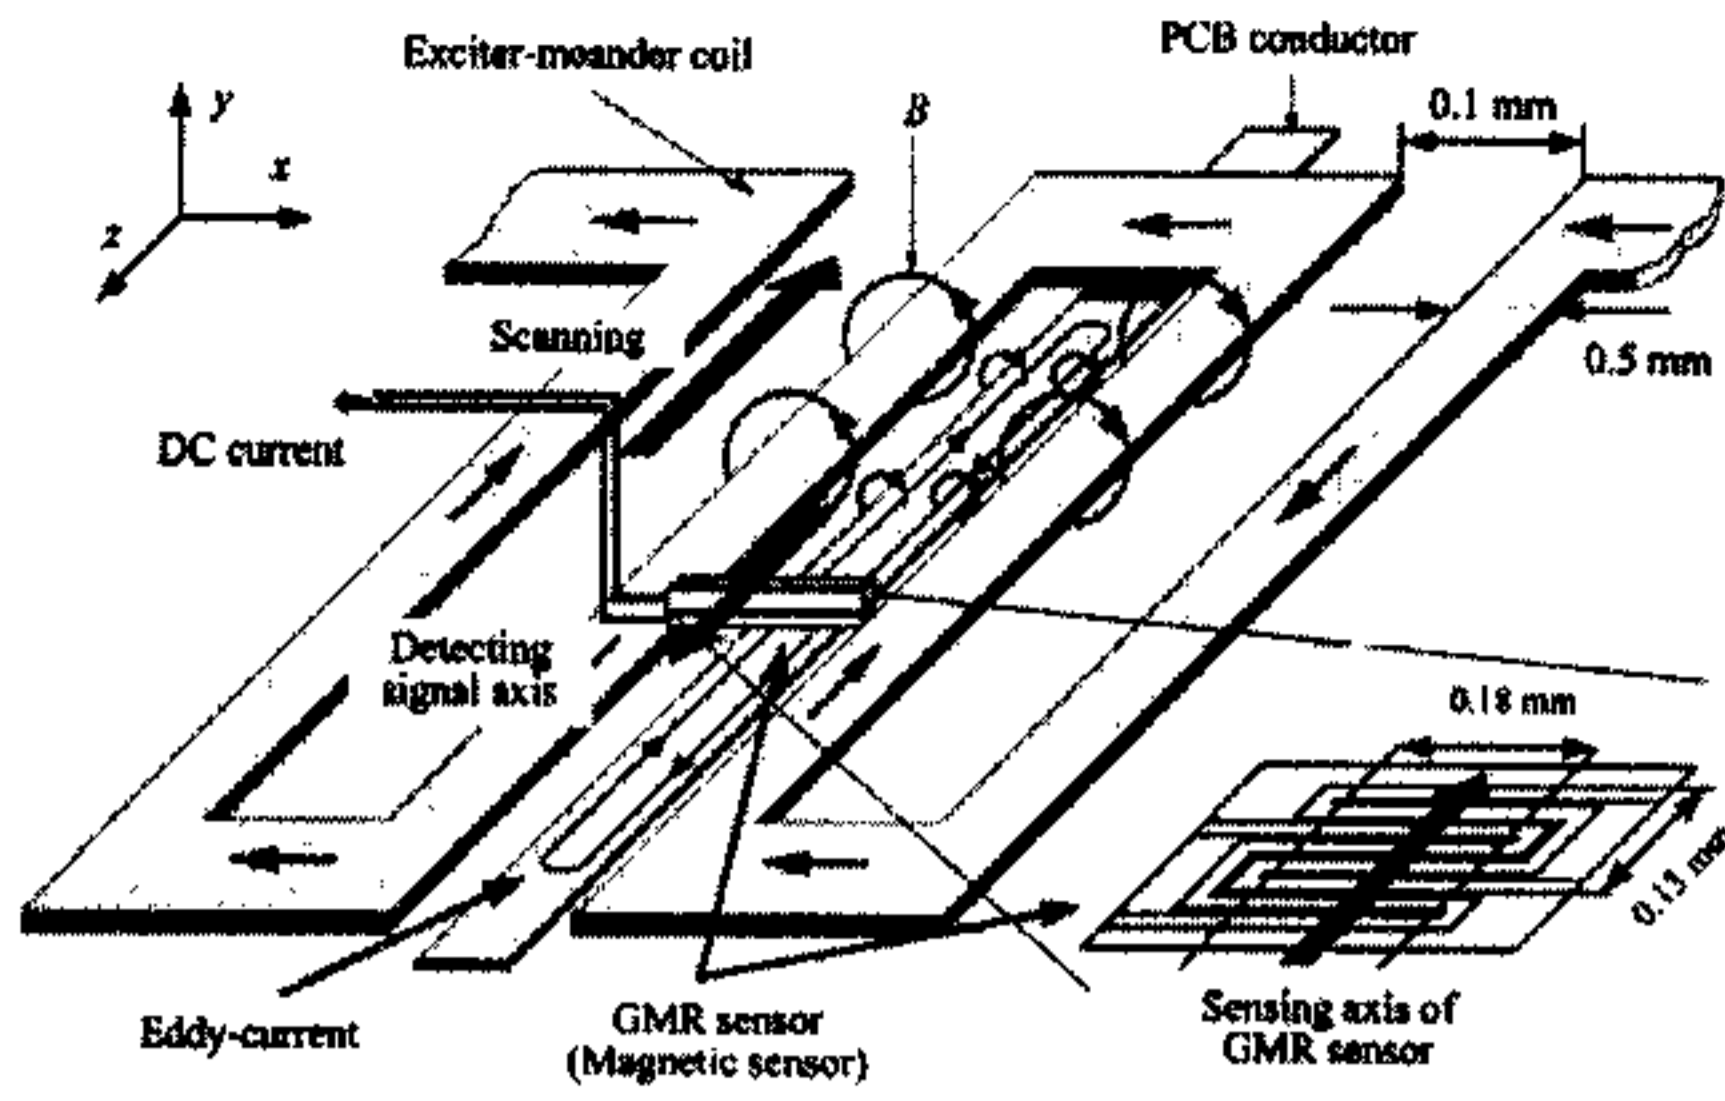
Construction of the proposed ECT probe for PCB inspection.
